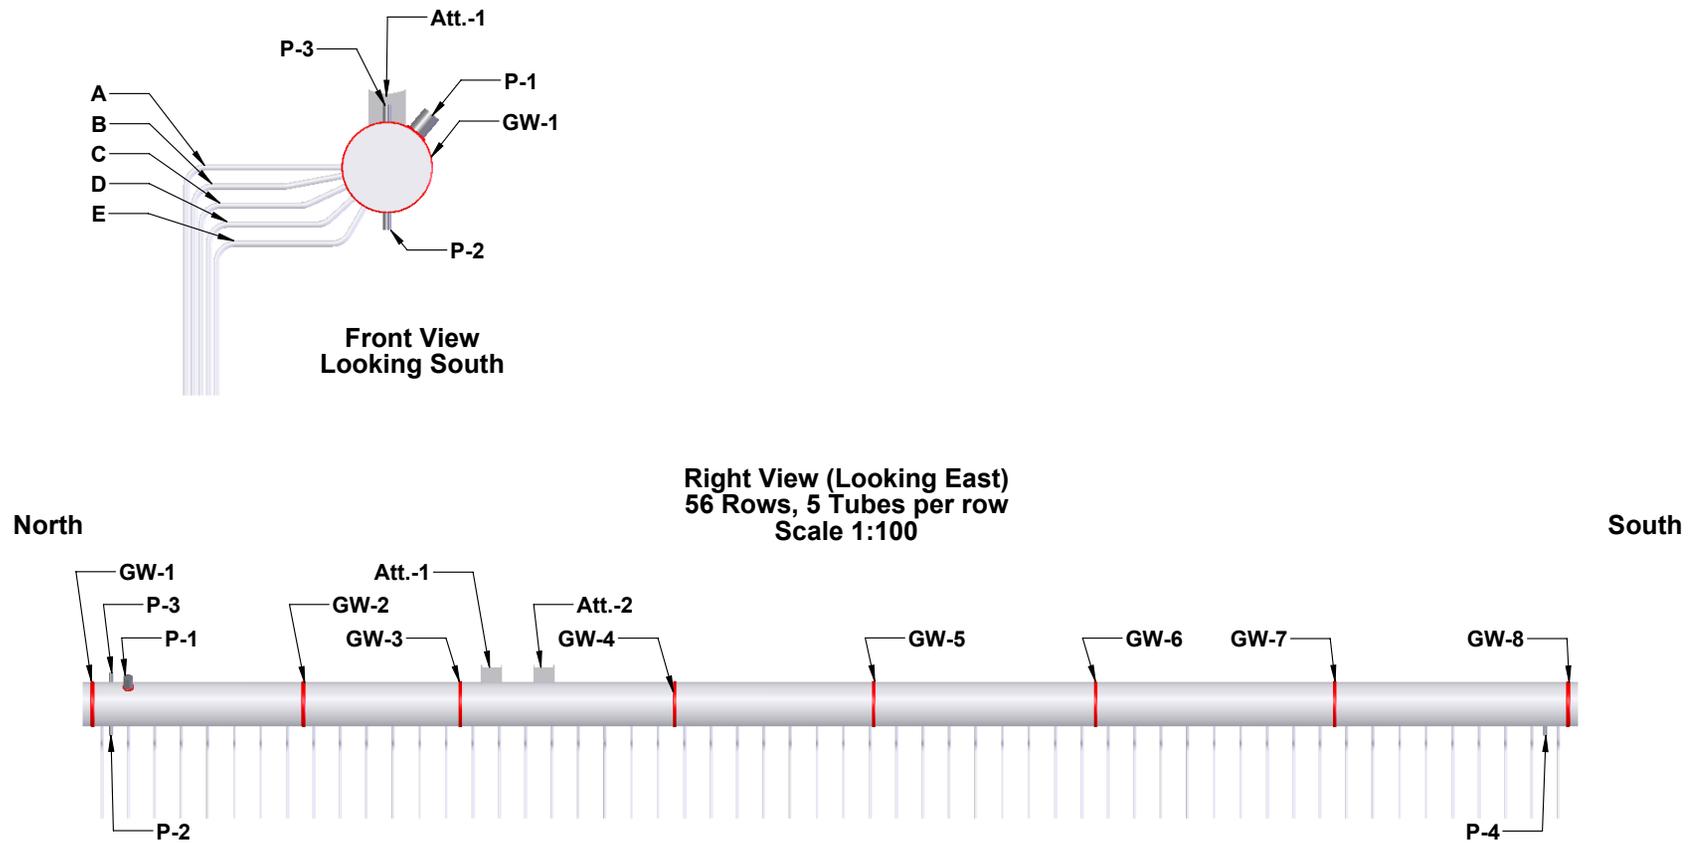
An overall sketch of the Lower Finishing Superheater Outlet
